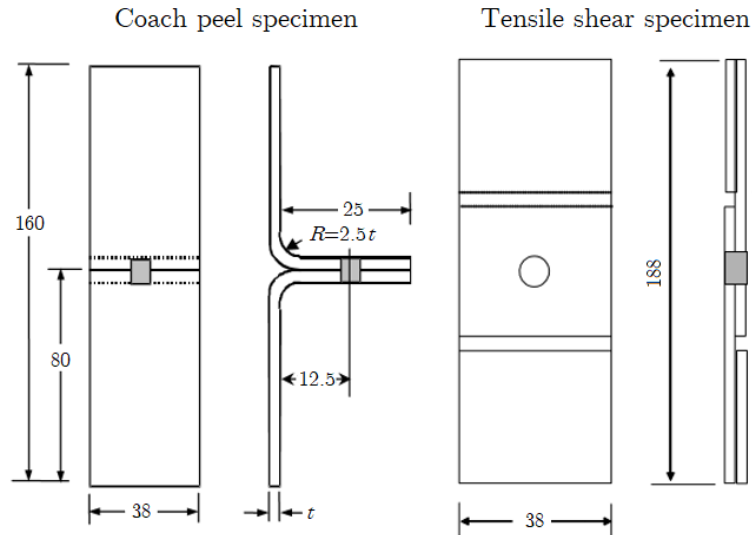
Spot-welded specimens used for experimental testing [14]
